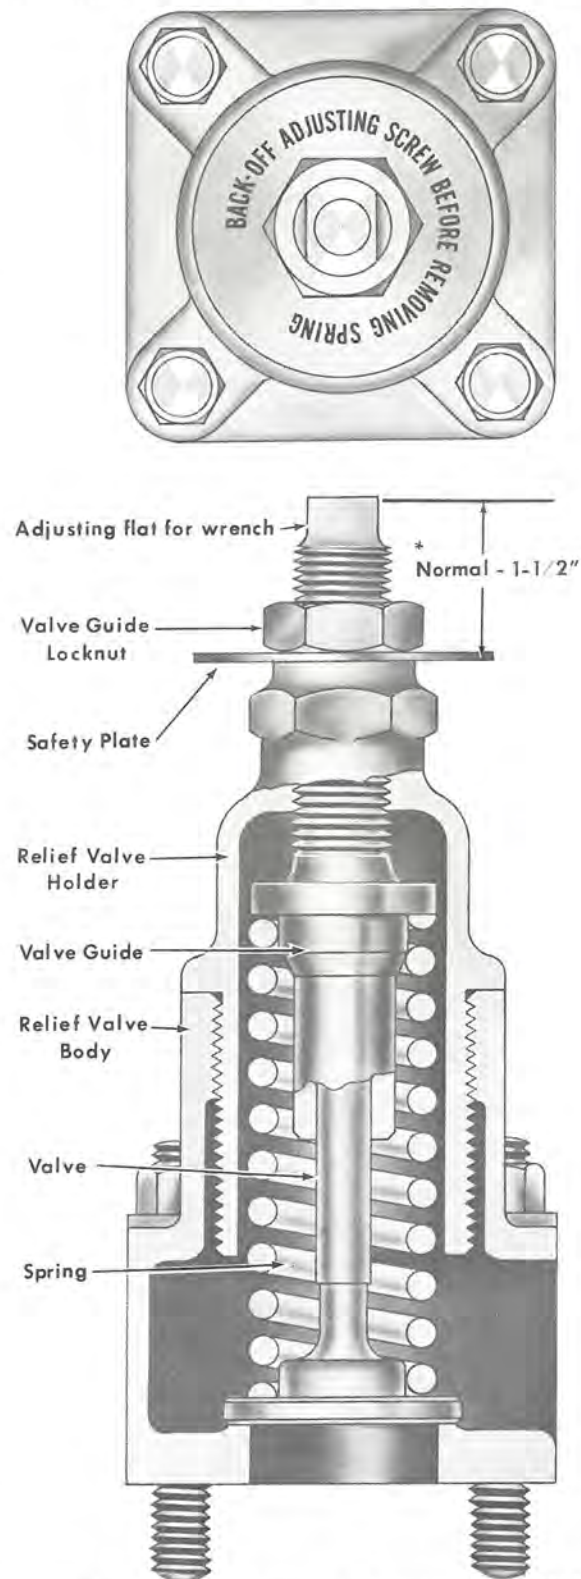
Lube Oil Pressure Relief Valve 10329
